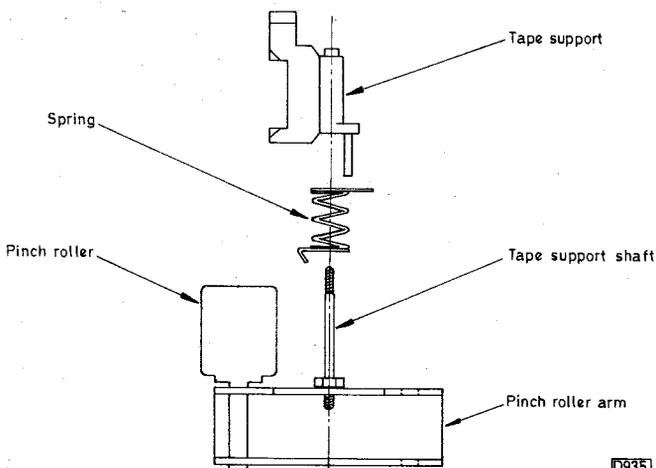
The pinch wheel tape support assembly used in the Amstrad Model VCR4600.
